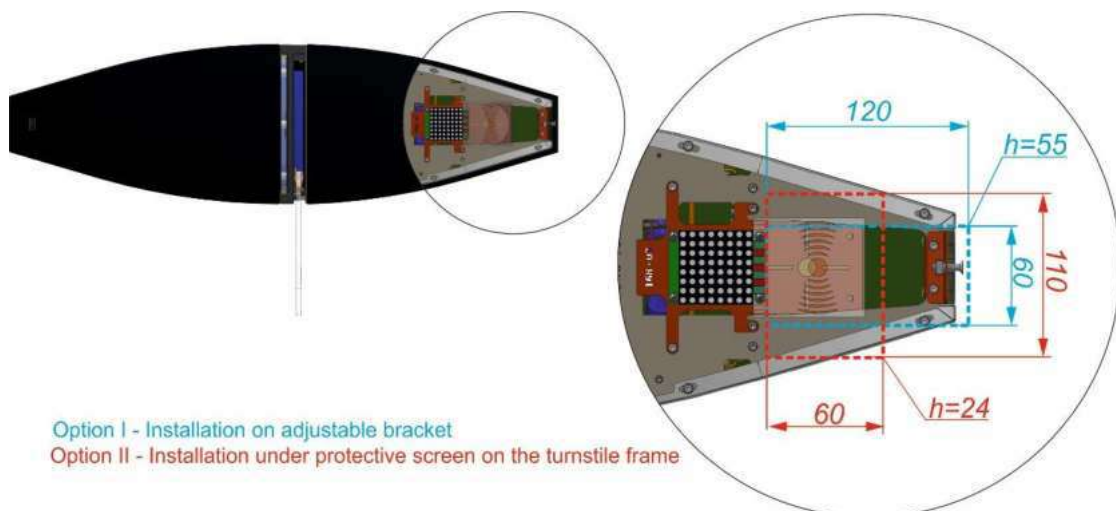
Maximum dimensions of identification card reader installed in turnstile “JetPan-BM”
